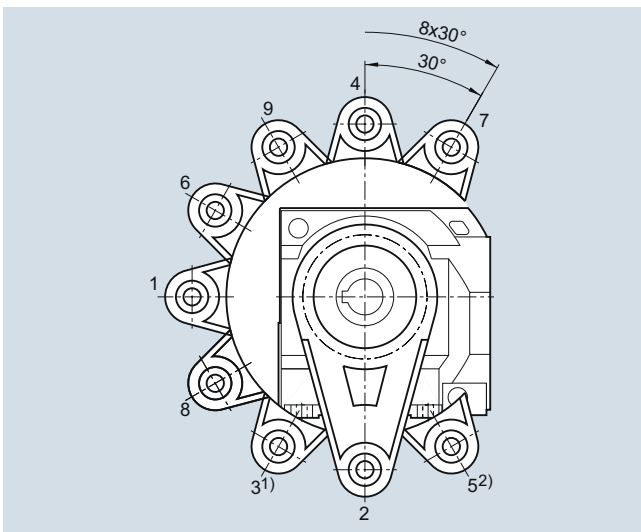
/11 Helical worm gearboxes CAD., Figure 1, sizes 39 to 89
